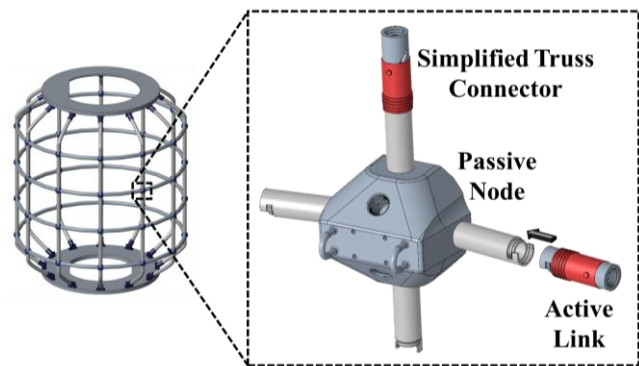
Constructible truss system uses a simplified truss connector with passive nodes and active links
